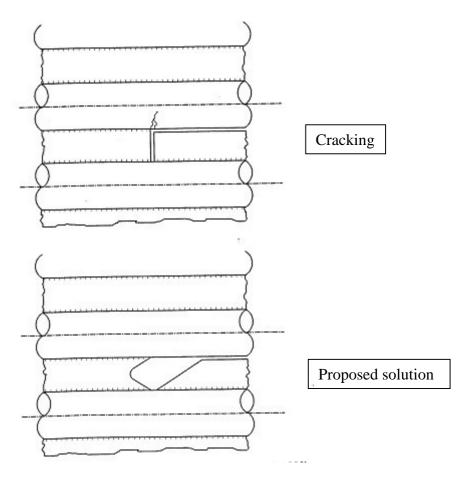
Cracking of evaporator wall in a new plant (1993).
